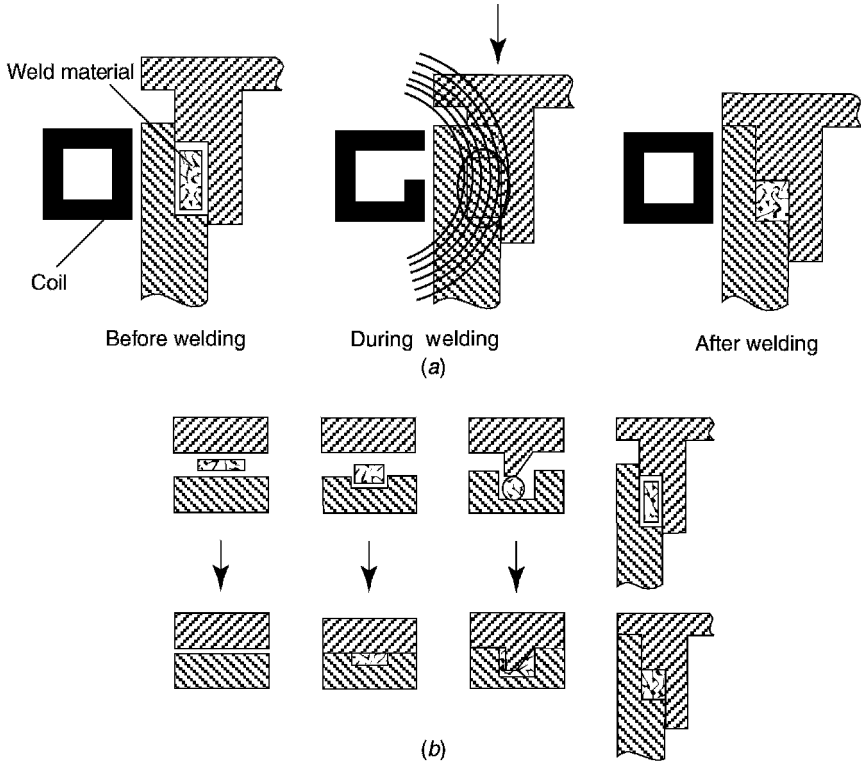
Induction welding process: (a) relationship of part, welding material, and electromagnetic coil; (b) common joint designs for induction welding. (From Ref. 12.)
